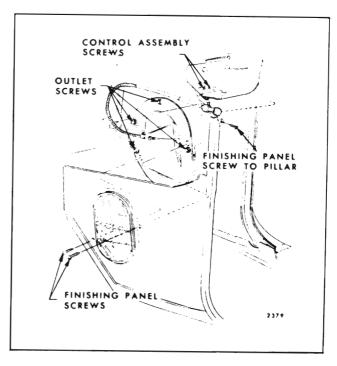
Shroud Side Finishing Panel and Shroud Side Air Outlet Duct Assembly - "A-B-C-D-E" Styles
